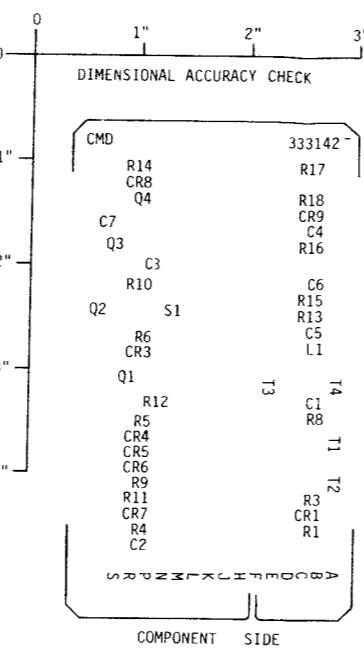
Assembly Drawing; Model 28 CPP KSR ESA
